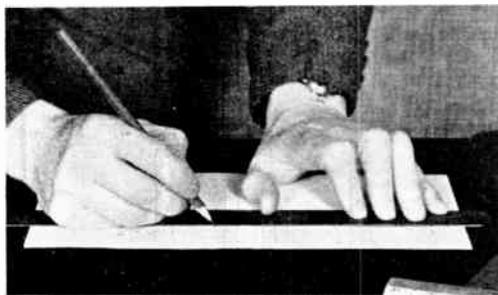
CONSTRUCTING THE TRANSFORMER BOBBINS.
